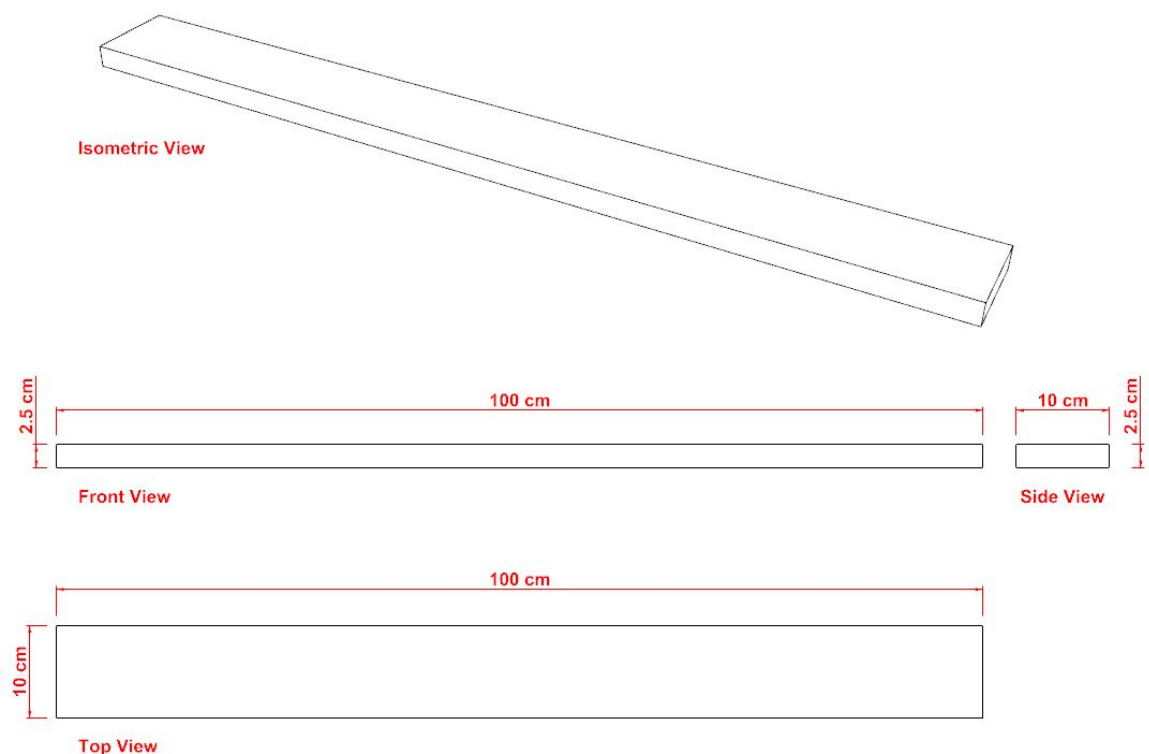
Projection drawing of a straight plank(Pat Tanner)
